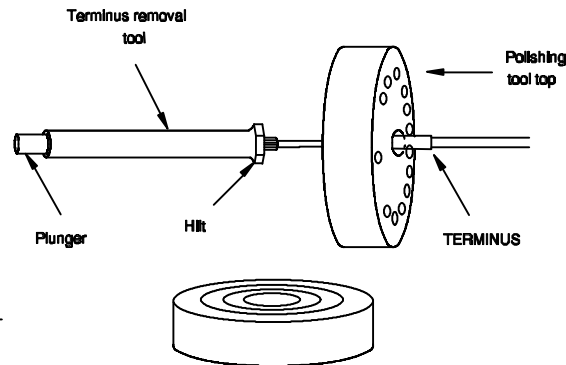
A1-43. Removing the terminus from the polishing tool.
